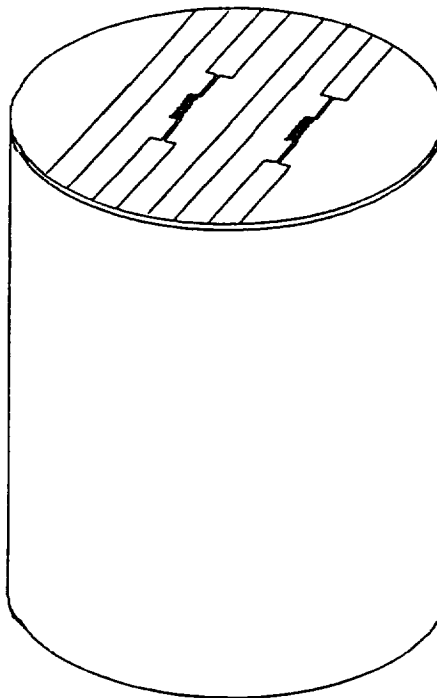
Four conductors for parallel-gap welding experiments
